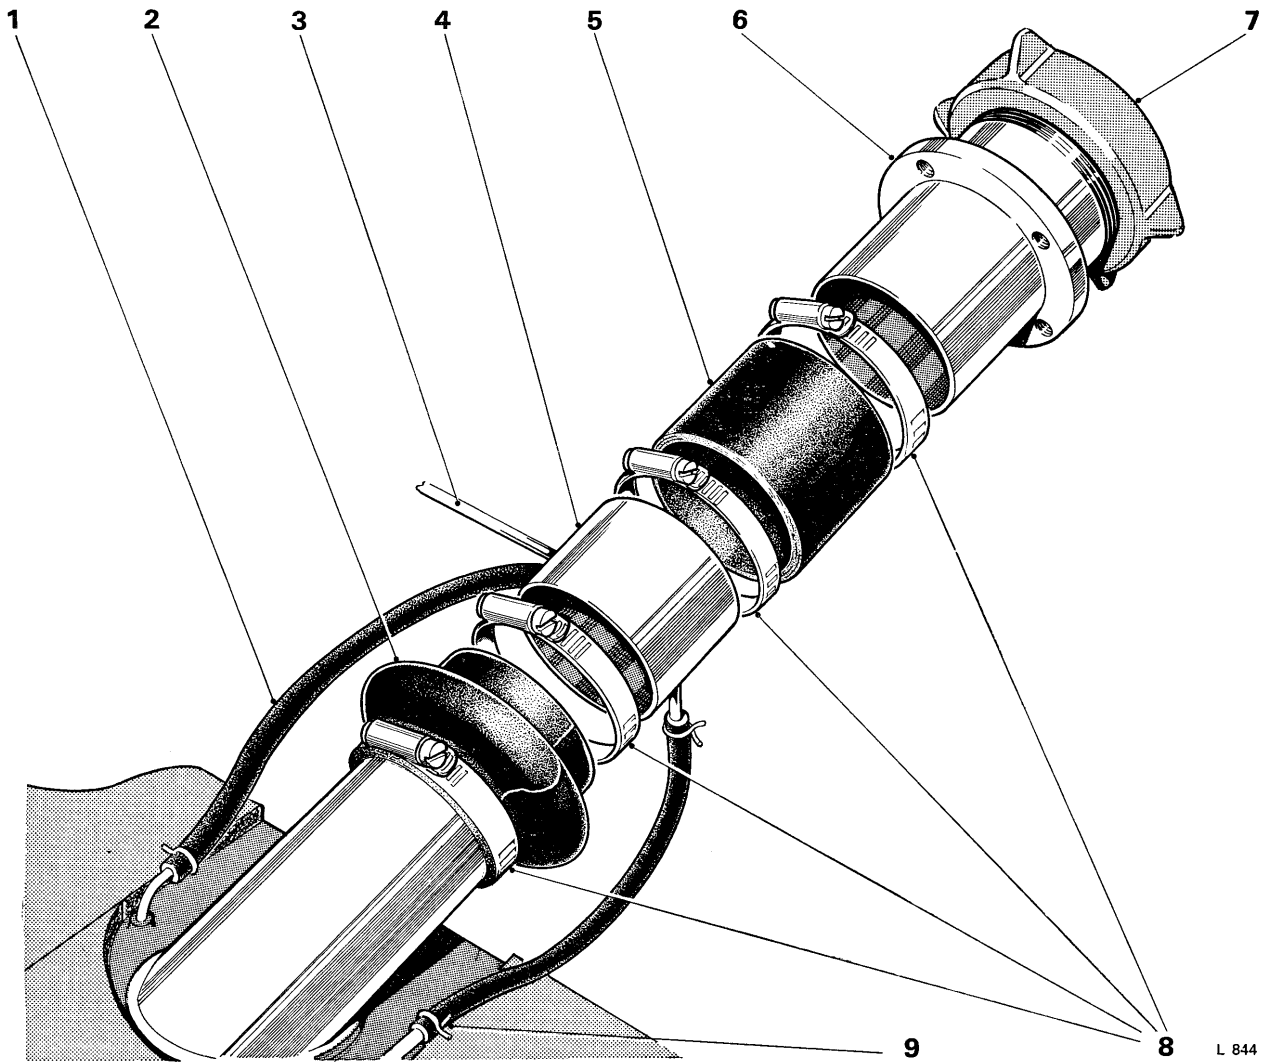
ARRANGEMENT OF THE FILLER TUBE ADAPTOR
